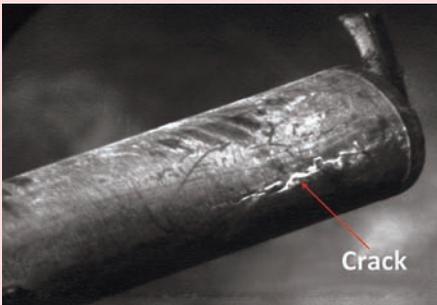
Crack on the cladding of an outer fuel pin from bundle no. 108305
